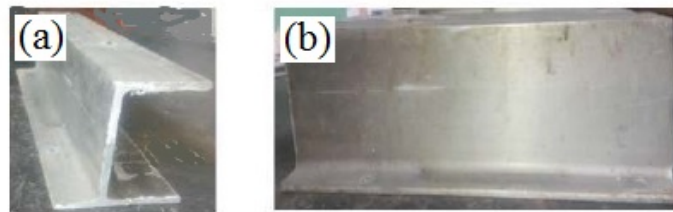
Views of the Extruded Al 6061 Alloy; (a) Section and (b) Side View
